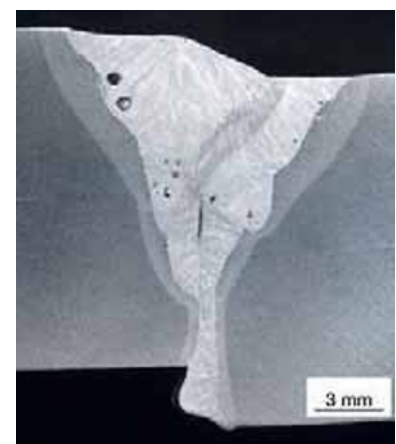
Cross-section of a hybrid welded sample with 0.5 mm gap and 3 mm linear misalignment
